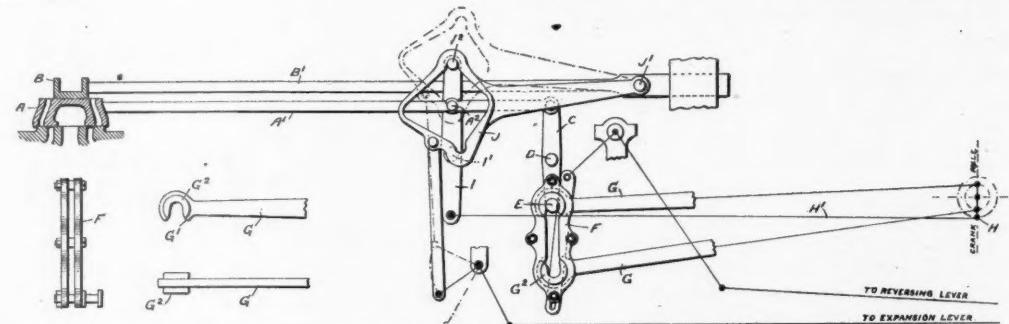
Sussex Railroad of New Jersey—Detail of Valve Gear, Engine "Gov. Haines," 1854.
